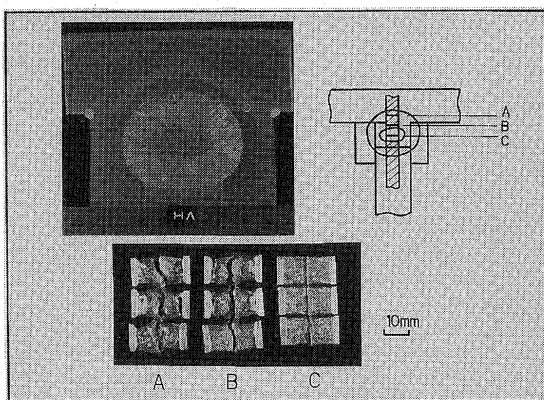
Fractured surface of impact test piece and macrostructure of ES weld metal
